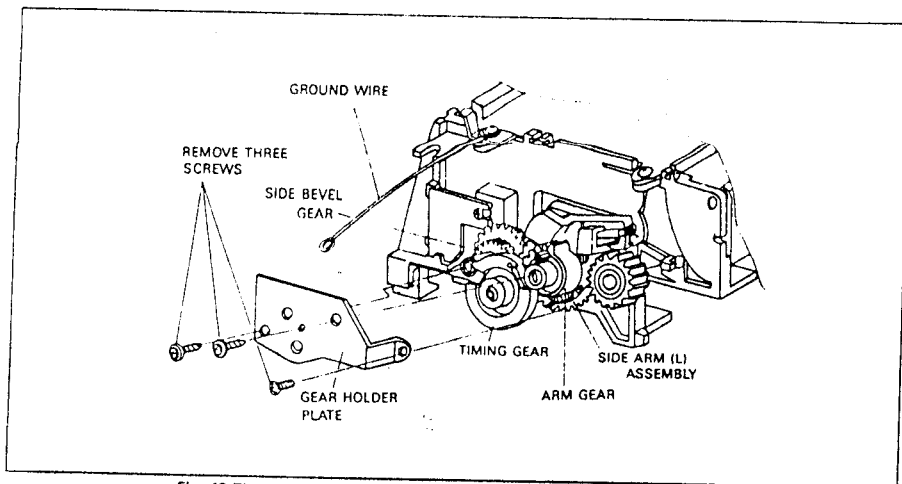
Timing Gear/Side Arm (L) Assembly/Side Bevel Gear Removal
